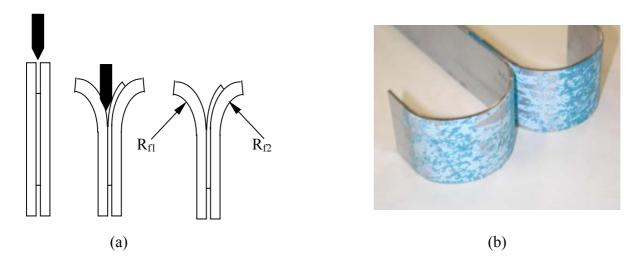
(a) Schematical presentation of the wedge-opening peel test, (b) Test specimen after fracture.
